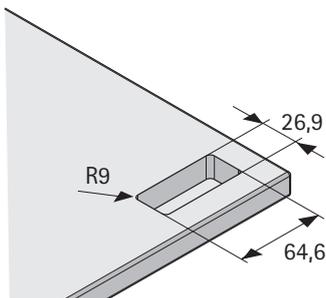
Milling pattern for installing the LegaMove Touch Basic Inlay handset with rubber flaps
